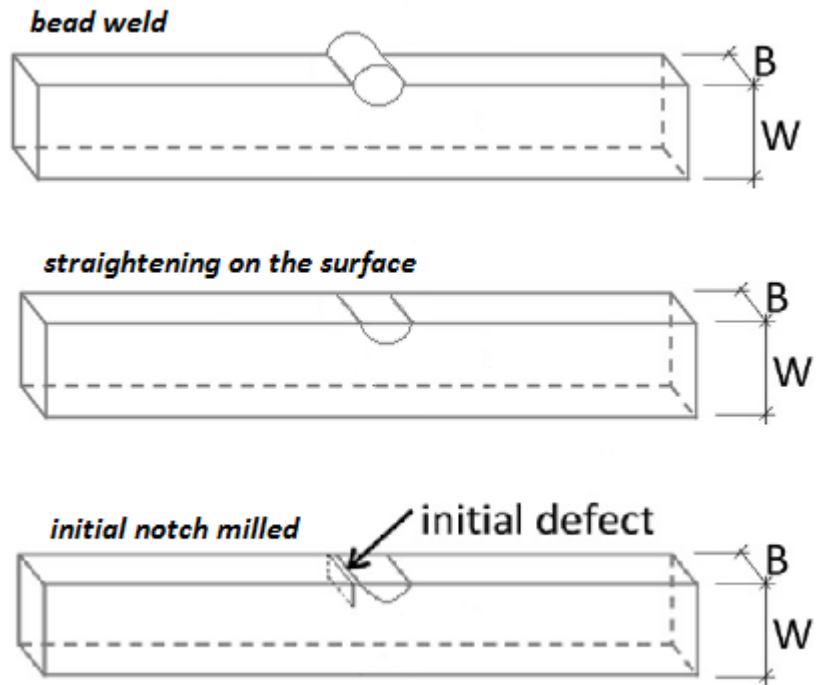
Welding, Straightening and milling initial notch
